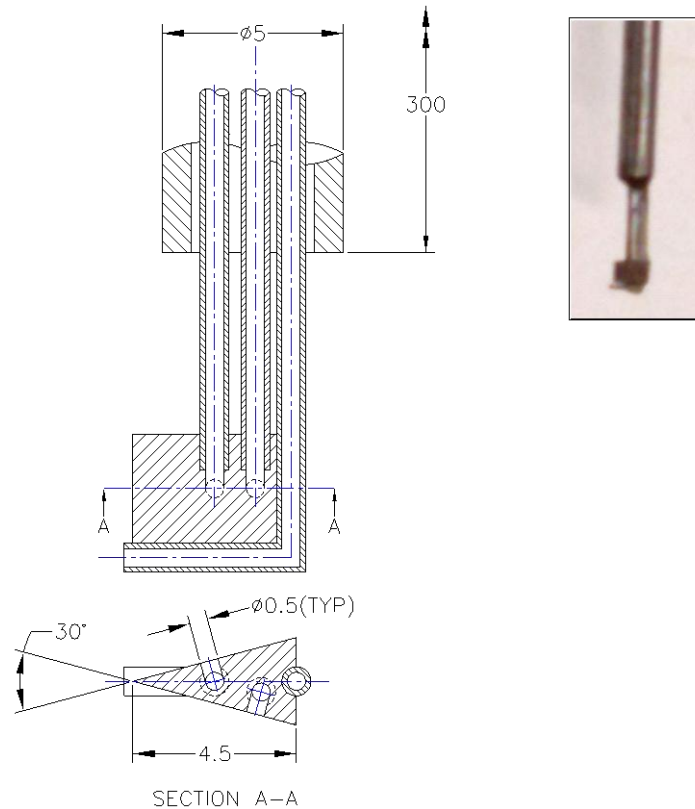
Sectional view of the wedge probe; dimensions are in mm. A photograph of the probe head is shown in the inset.
